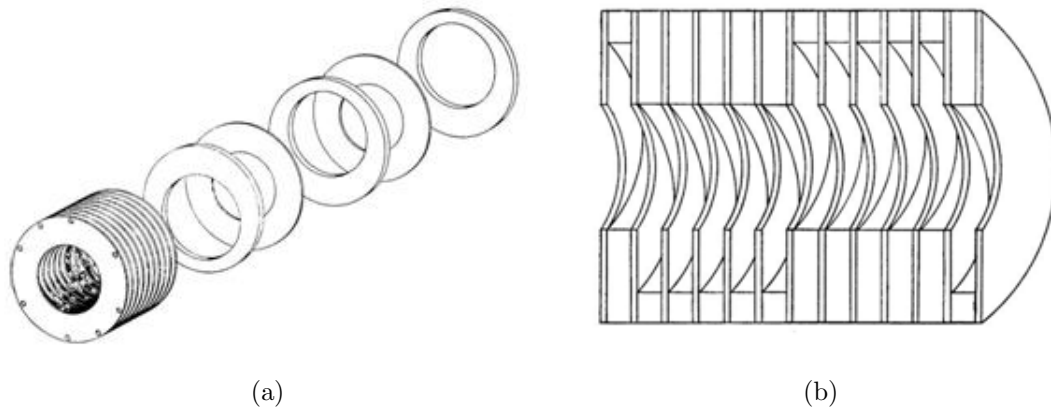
Exploded view (a) and sagittal view (b) of disc oxygenator (Melrose and Aird, 1953)
